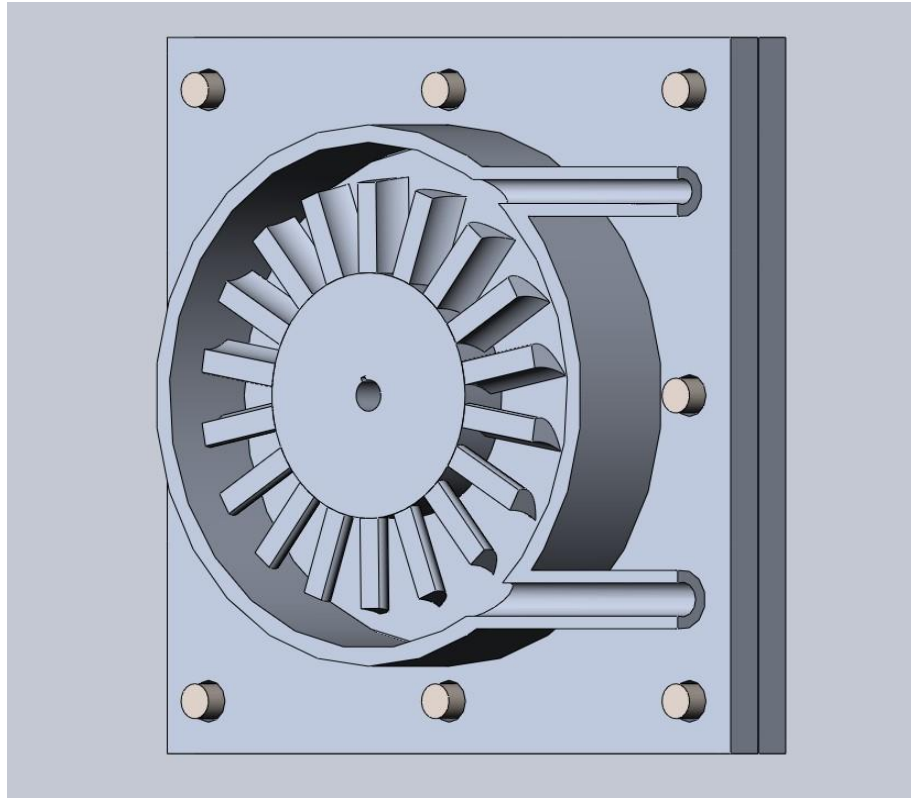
Isometric Sectional view of Assembled Casing with Turbine inside
